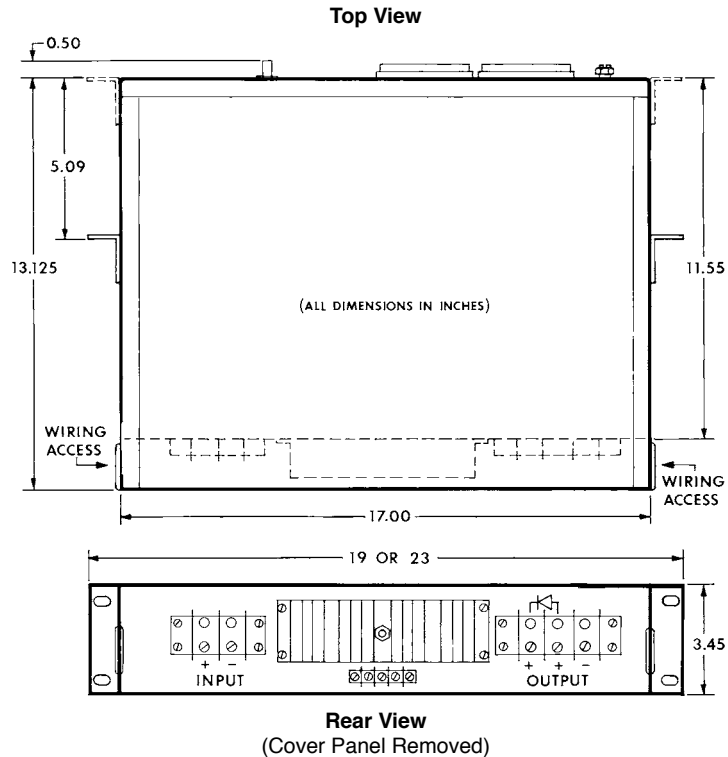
Converter shown with optional meters, auxiliary contacts and paralleling diode with heatsink.
